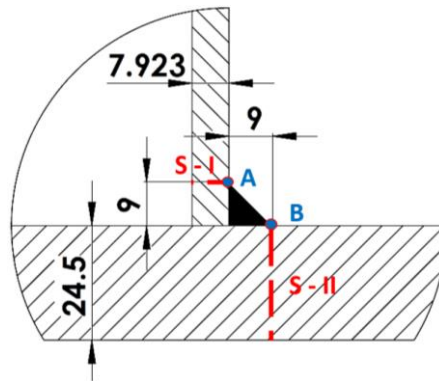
7: Upper and lower weld toe and through-thickness cross-sections
